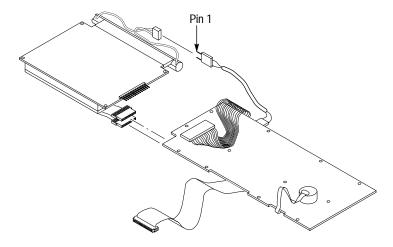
Disconnecting the LCD Display module and Front Panel board
